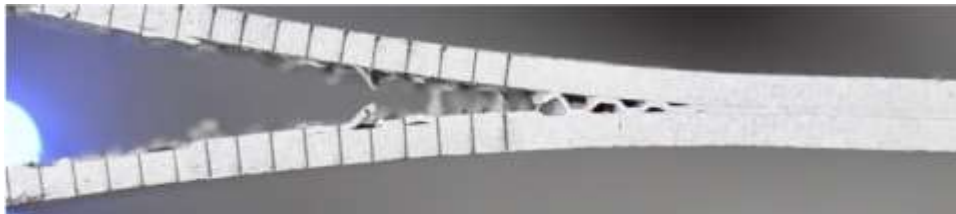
An instance of adhesive ligaments bridging the crack faces in B8.
